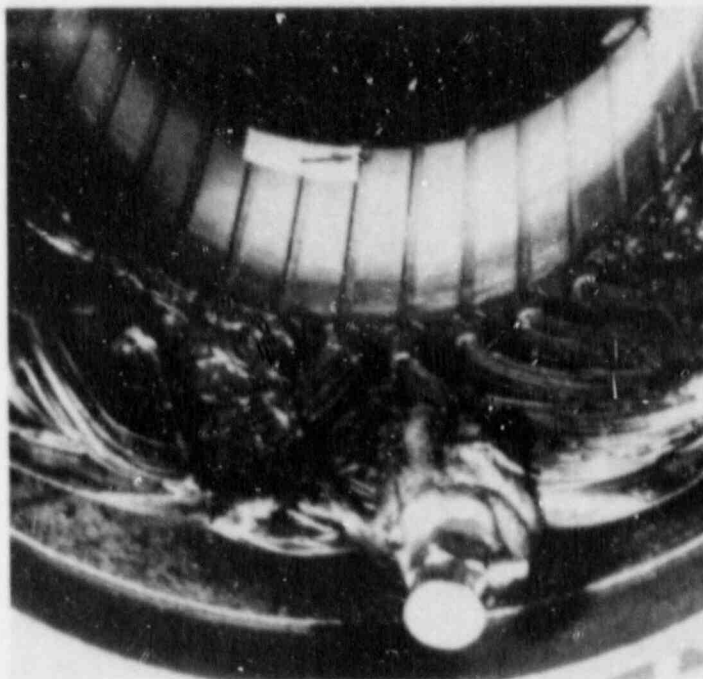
Photograph of the stator (with rotor removed) showing close-up of accelerometer mounted on the end turn.
